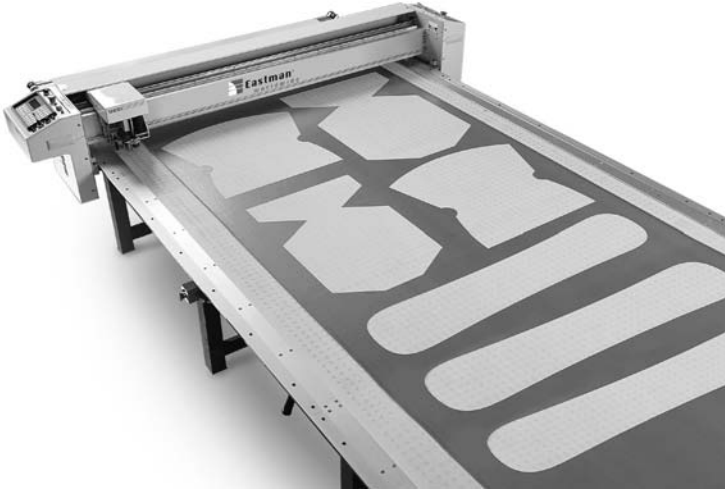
View of a small automatic prepreg cutting machine. This shows how the plies have been positioned to minimize wastage. (Photograph by courtesy of the Eastman Machine Co., Rochester, NY, Model M9000)
